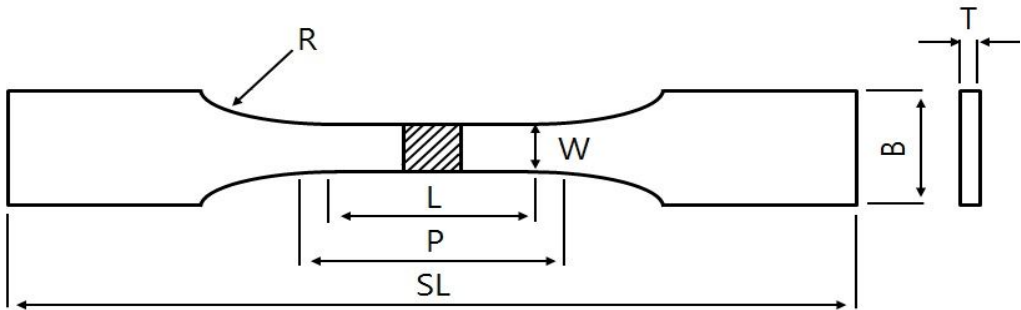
Dimension of tensile test specimen (3mm and 19mm)
